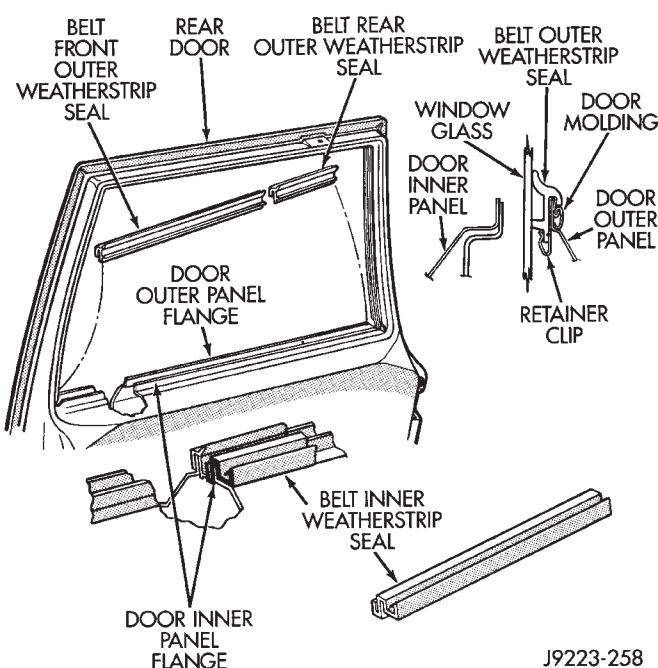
Rear Door Belt Outer and Inner Weatherstrip Seal
